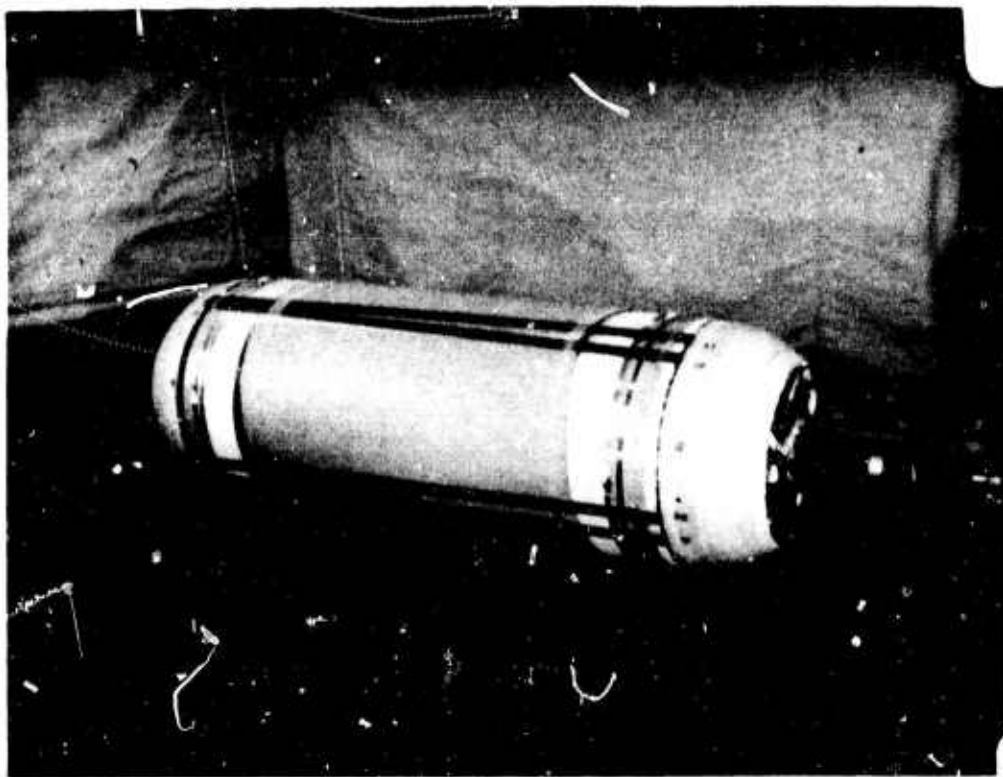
Positioning and Bonding of Aluminum Segments on Component Skin Outer Surface.
